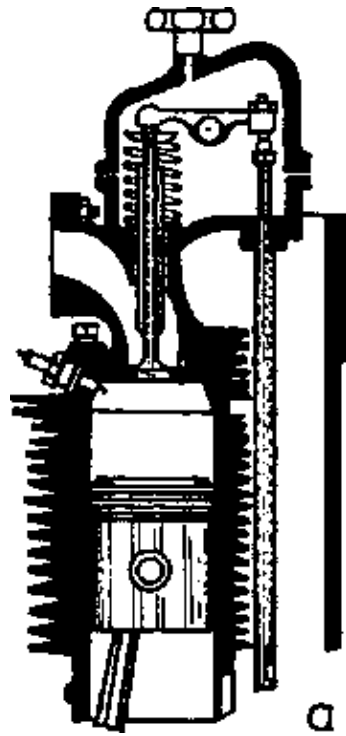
/16 Engine timing by means of overhead valves – with camshaft located near the crankshaft
